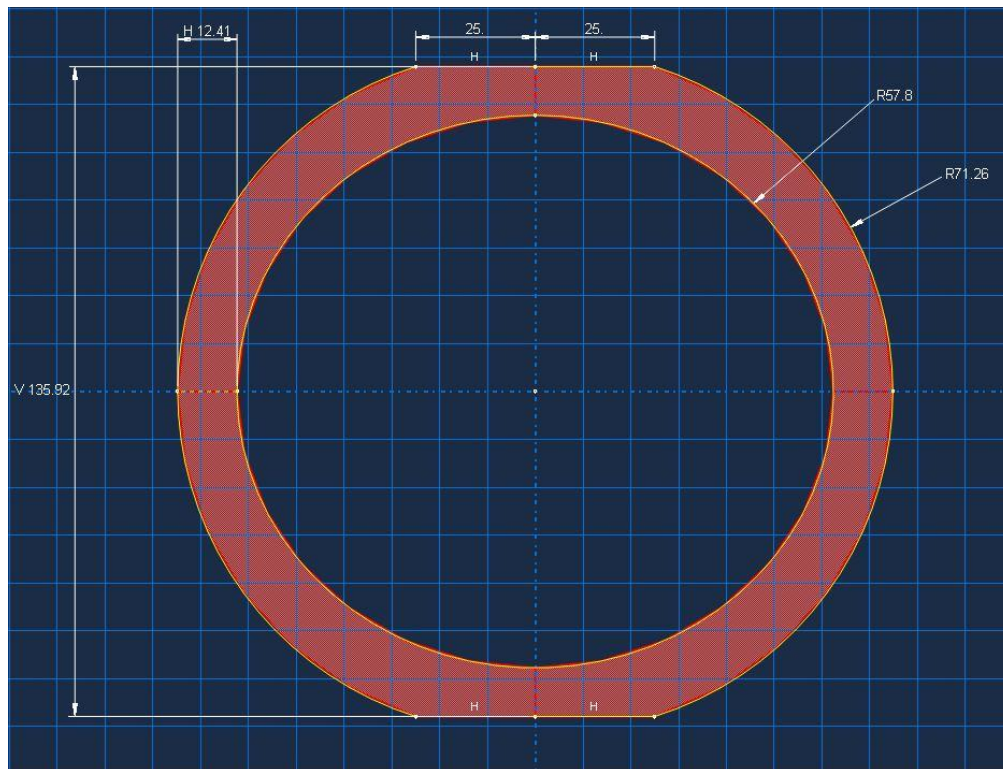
Modified ring design at ring thickness 12.41mm. Dimensions are in mm.
